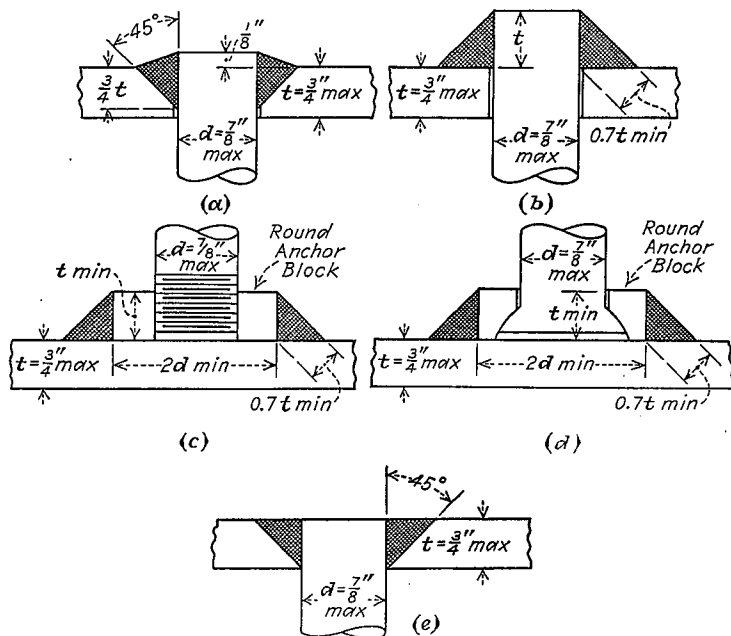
TYPICAL FORMS OF WELDED STAYBOLTS
